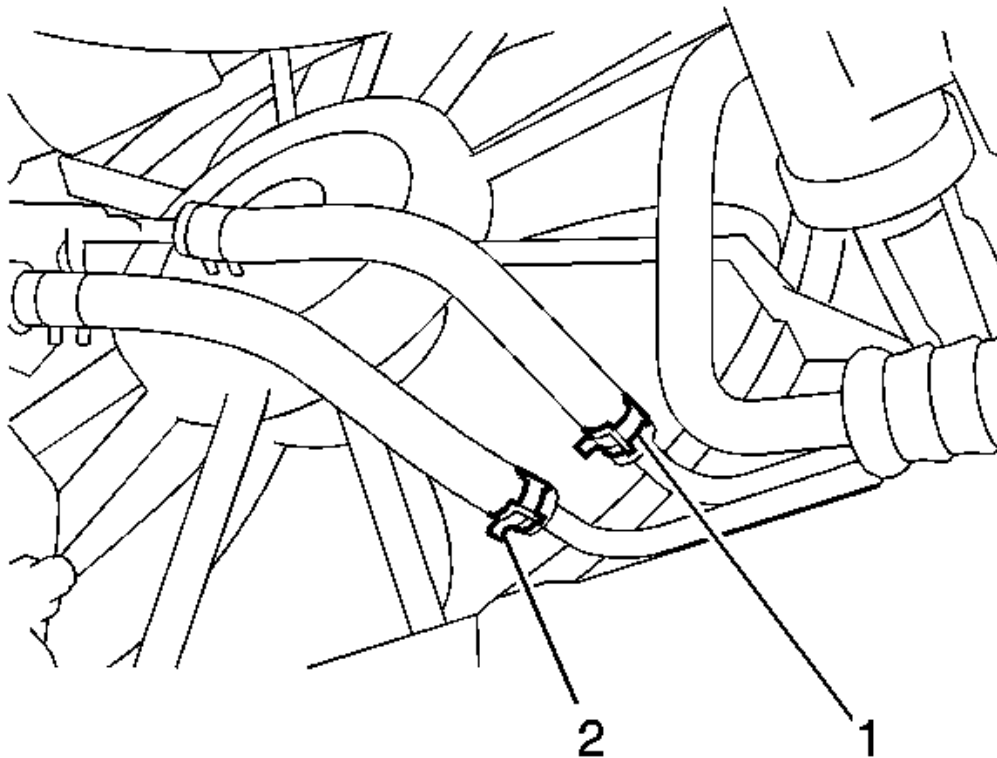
Identifying Cooler Hoses & Oil Cooler Tube
